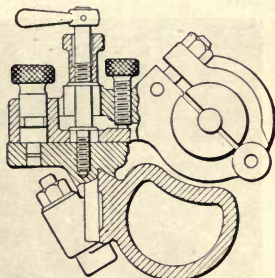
Closed-type Norton steady-rest for camshaft grinding.
